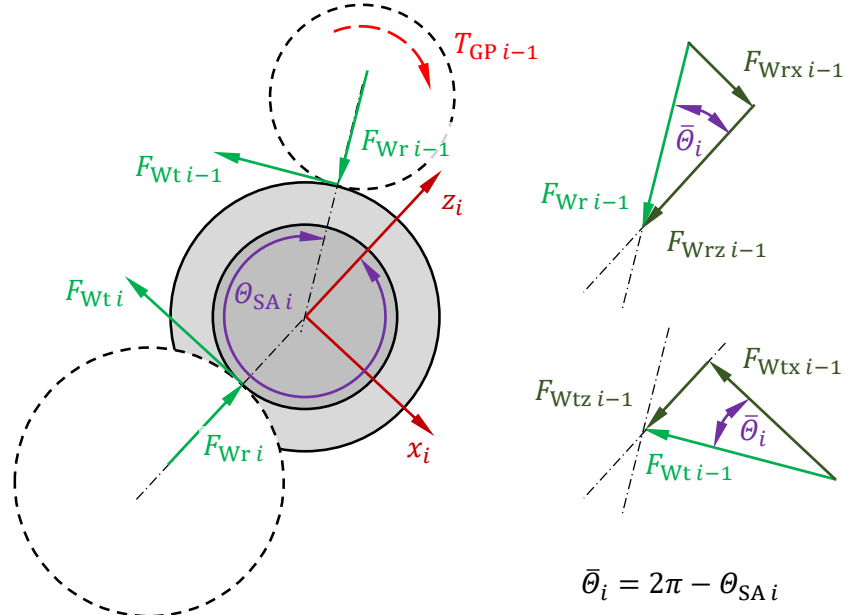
Gear forces acting on an arbitrary shaft assembly
